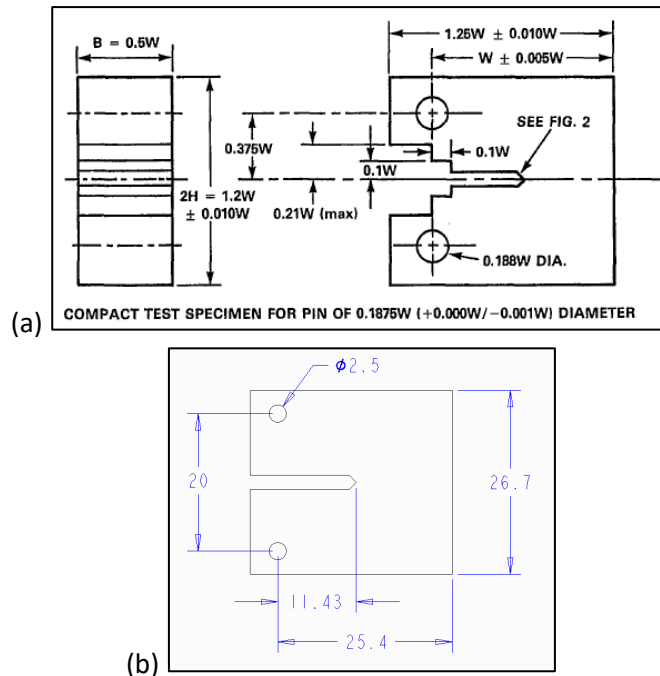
Geometry Of Compact Tension Specimen (a) In ASTM E813 [7] and (b) The Compact Tension Specimen For The AM Polymers Tested In This Study. Dimensions are in millimeters.
